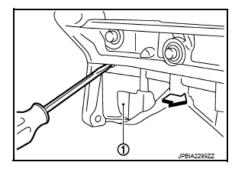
Inserting Tool Into Notch Of Oil Pan (Upper) Courtesy of NISSAN MOTOR CO., U.S.A.
